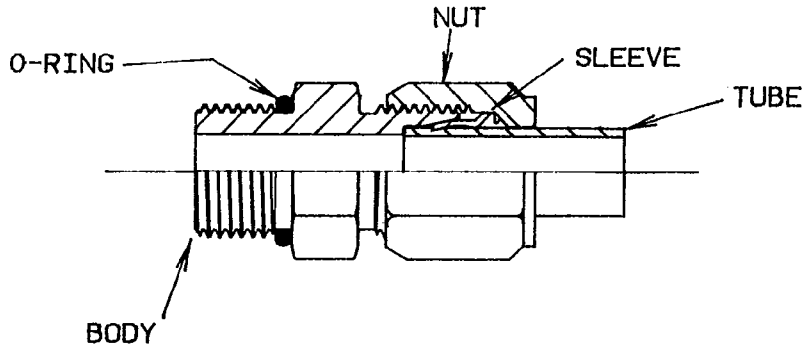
Typical fitting assembly showing body, O-ring, nut, sleeve and tube.
